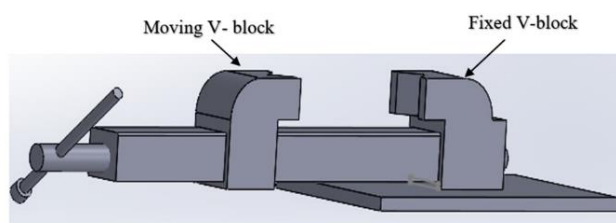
Fixture concept with fixed and movable 45° V-blocks.
